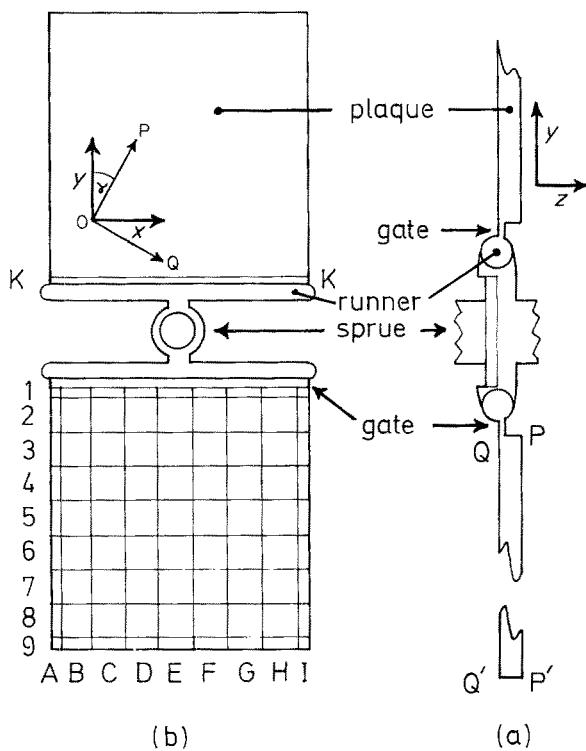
Side view (a) and plan view (b) of the pair of plaques obtained from the water-cooled mould. During manufacture the position of the mould is such that the plane of the plaques is horizontal.
